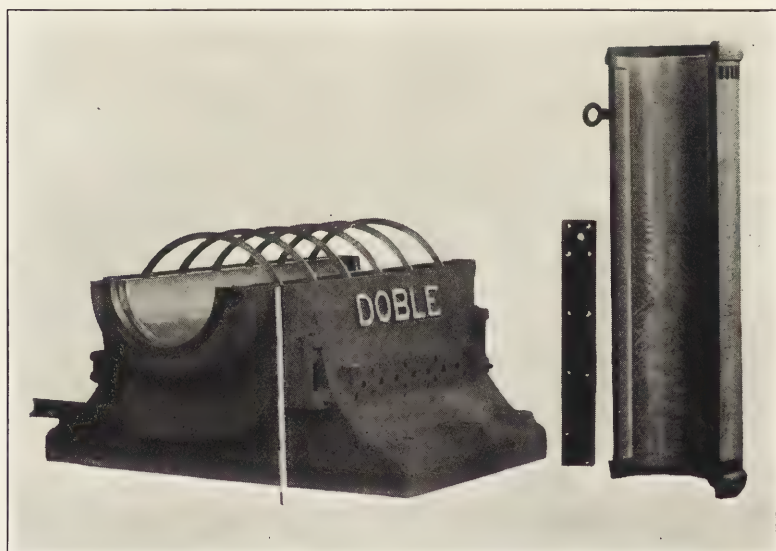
Heavy-pressure High-speed Bearings. Shows arrangement of lubricating-oil rings, and the construction of the removable revolving shell. Also shows arrangement of water-cooling tubes through oil storage in base of bearing.
